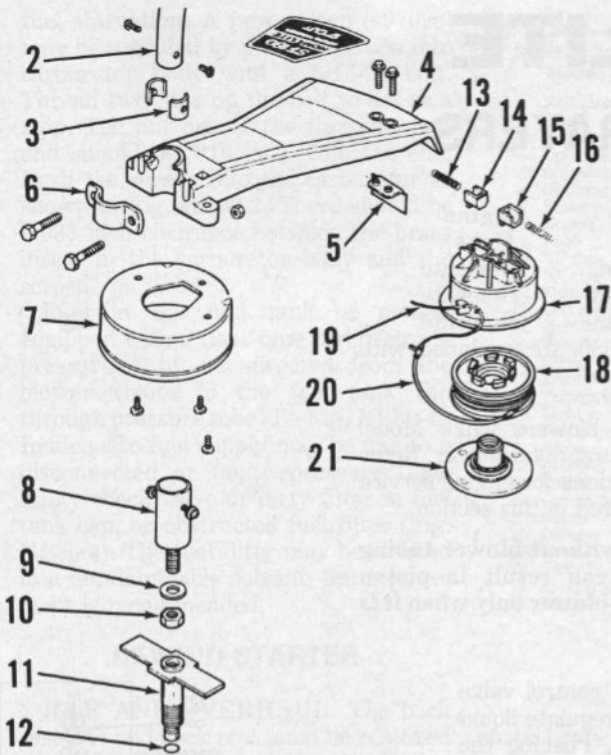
Exploded view of lower head on Models ST-160 and ST-180.
